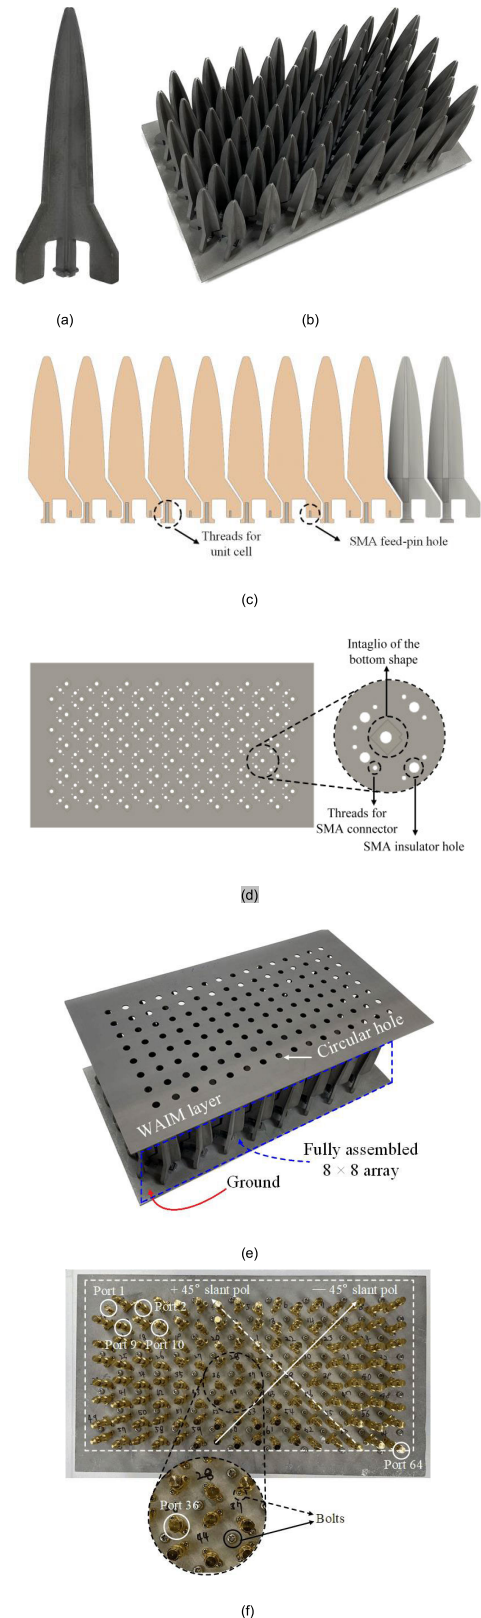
Photographs of the fabricated array antenna. (a) Vivaldi unit cell structure. (b) The fully assembled 8 × 8 array. (c) Side view of the 3D CAD cross section of metal Vivaldi arrays. (d) Top view of the 3D CAD of ground. (e) The fabricated 8 × 8 array with the WAIM layer. (f) The bottom view of the fabricated array antenna.
